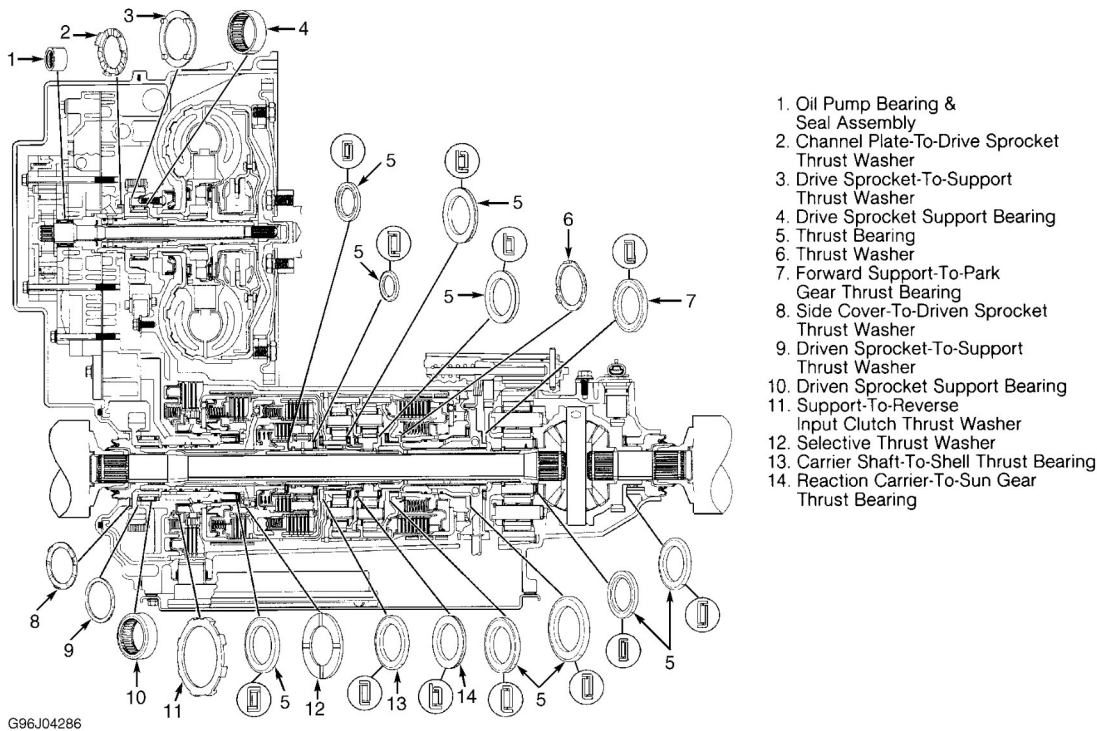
Identifying Hydra-Matic 4T40-E & 4T45-E Thrust Bearing & Thrust Washer Locations
